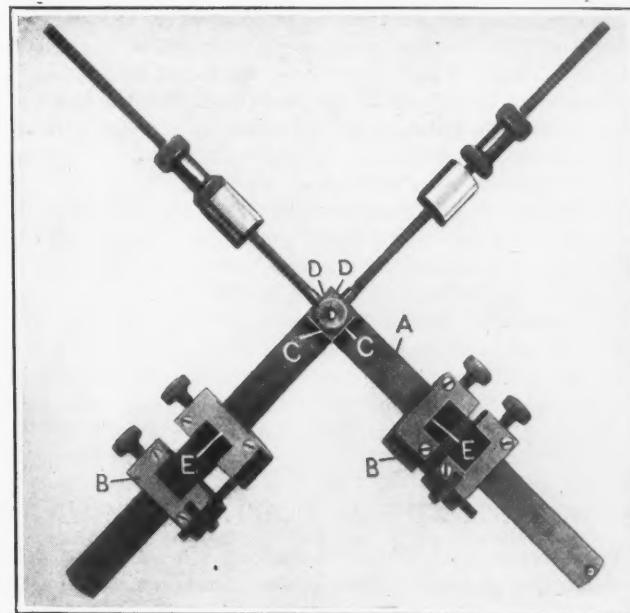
Instrument designed to facilitate the Accurate Laying out of Holes on Dies, Fixtures, etc.
